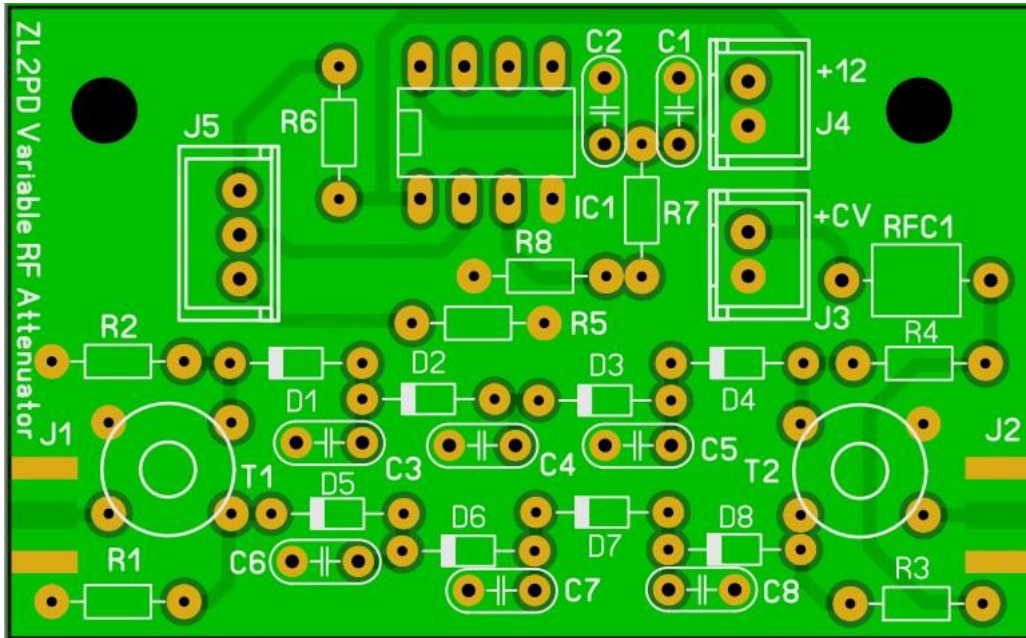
Updated double-sided prototype PCB layout of the original single sided prototype PCB. This version provided an improved frequency response.
